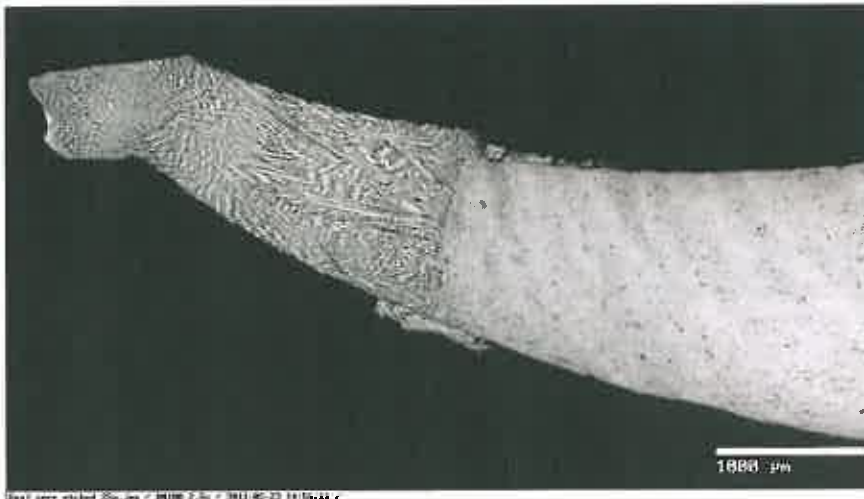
Cross section, in etched condition, shows the seal tooth with the dabber weld repair.
